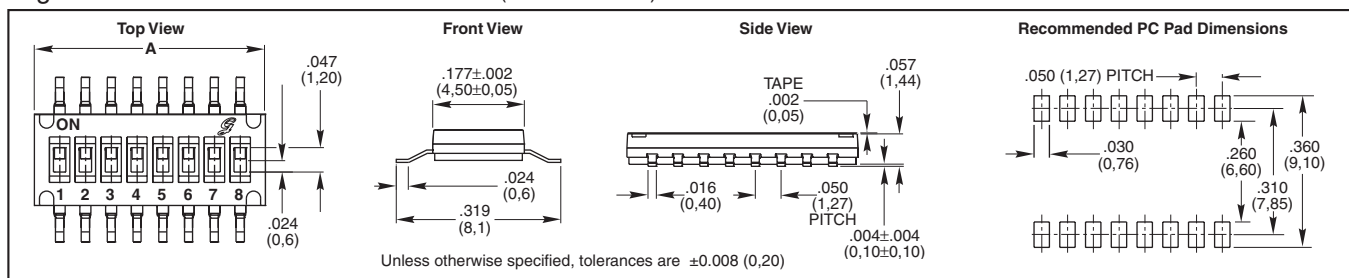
Series 97R DIMENSIONS In inches (and millimeters)
